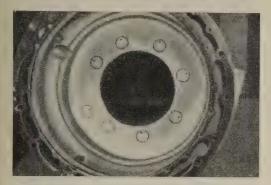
Inside wall of a torque converter gearbox with core stoppers.
